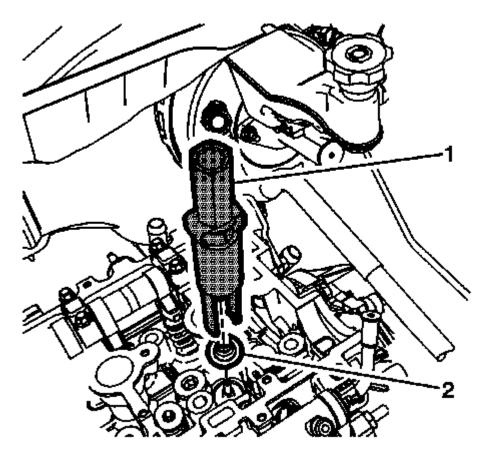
Valve Guide Seal Remover/Installer Courtesy of GENERAL MOTORS COMPANY
